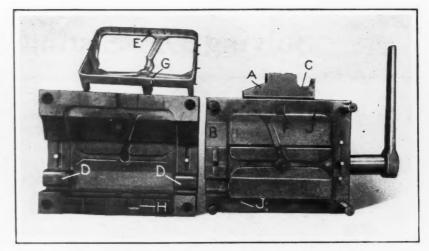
Typewriter Frame Die-casting and Dies in which it is cast
